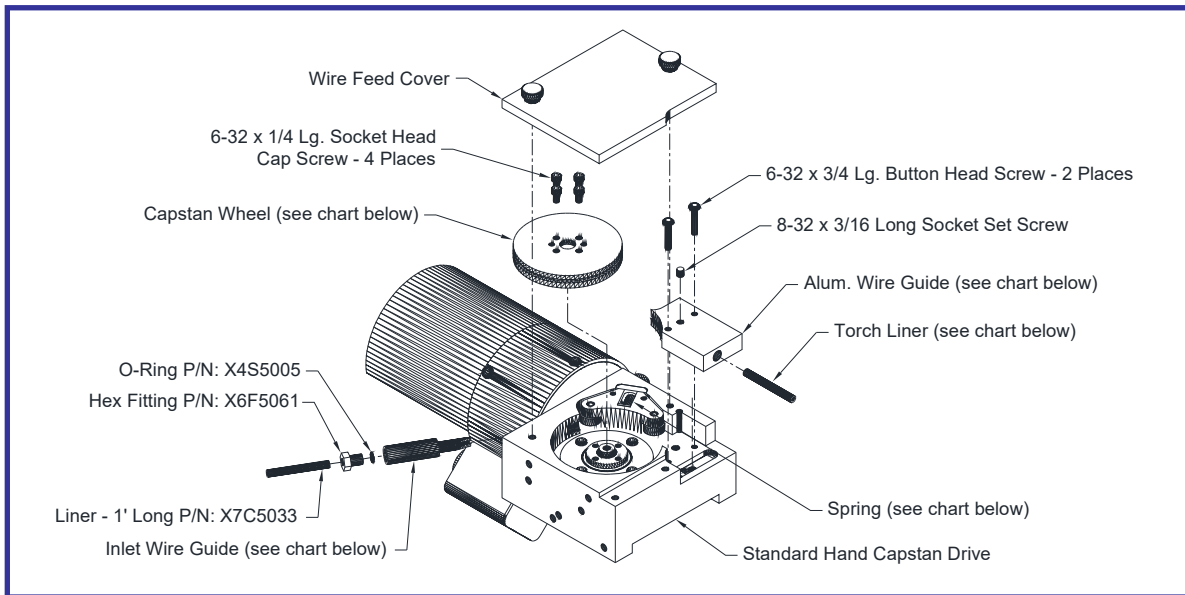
Aluminum Pick-up Block Standard Hand Wire Drive Configuration
